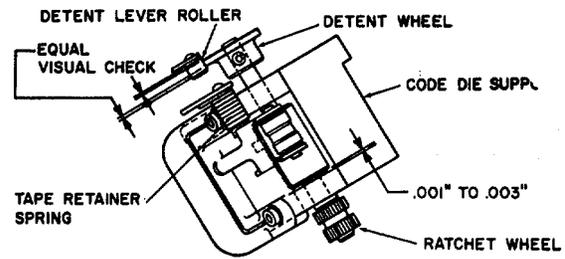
Tape feed sprocket and retainer bracket adjustment.
